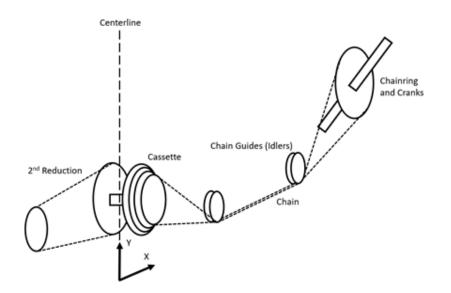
Rear-wheel drive with multiple chain guides (idlers) and two reductions
